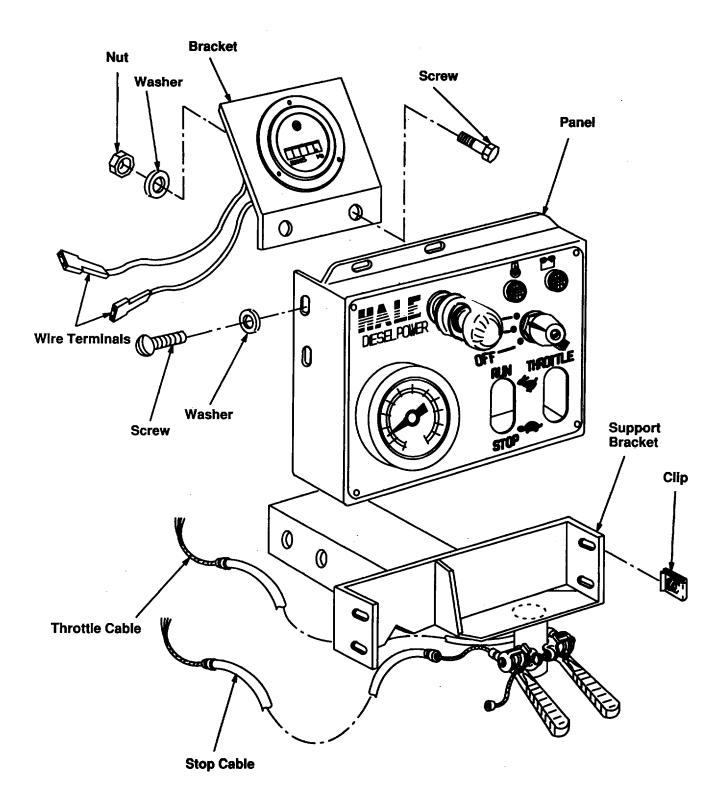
Hour Meter, panel and Engine Control Cables.
